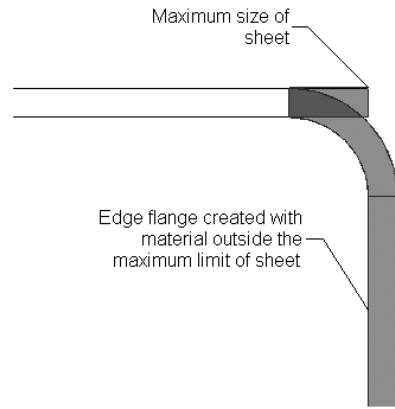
Edge flange created with the Material Outside button chosen
